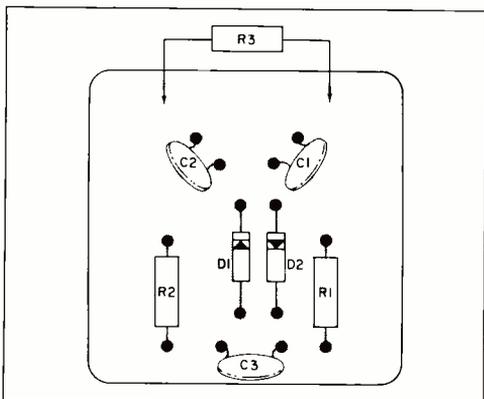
Component side of actual-size printed circuit board with "see-through" view of foil side.
